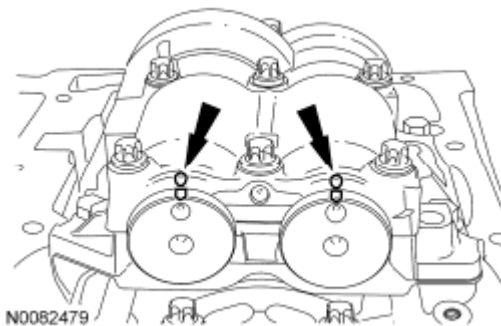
Locating Balancer Unit And Shafts Reference Mark
